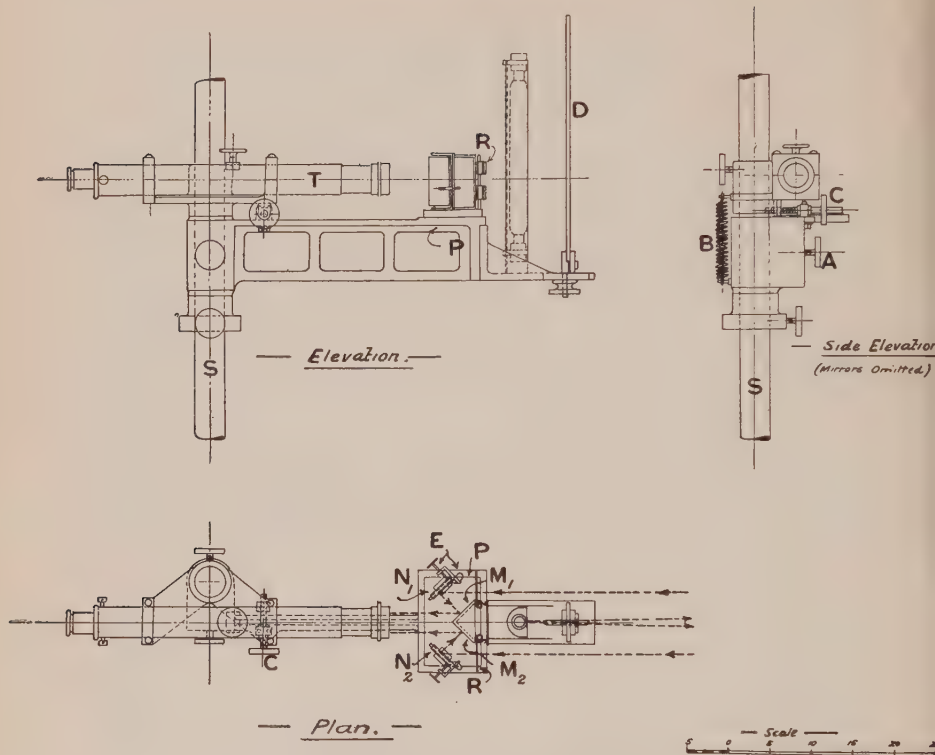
Measuring Arrangement for Mirror Extensometer.
